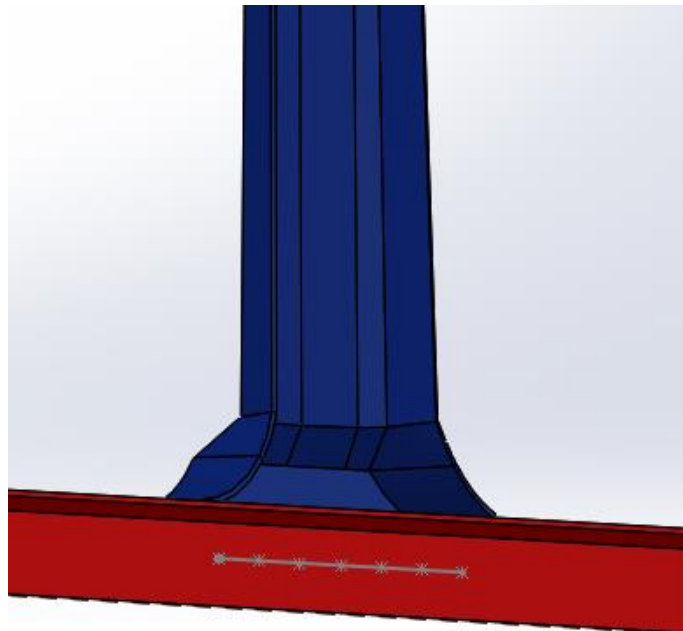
Detail of Micro Plasma Welding in SW on the lower side of Pillar B
